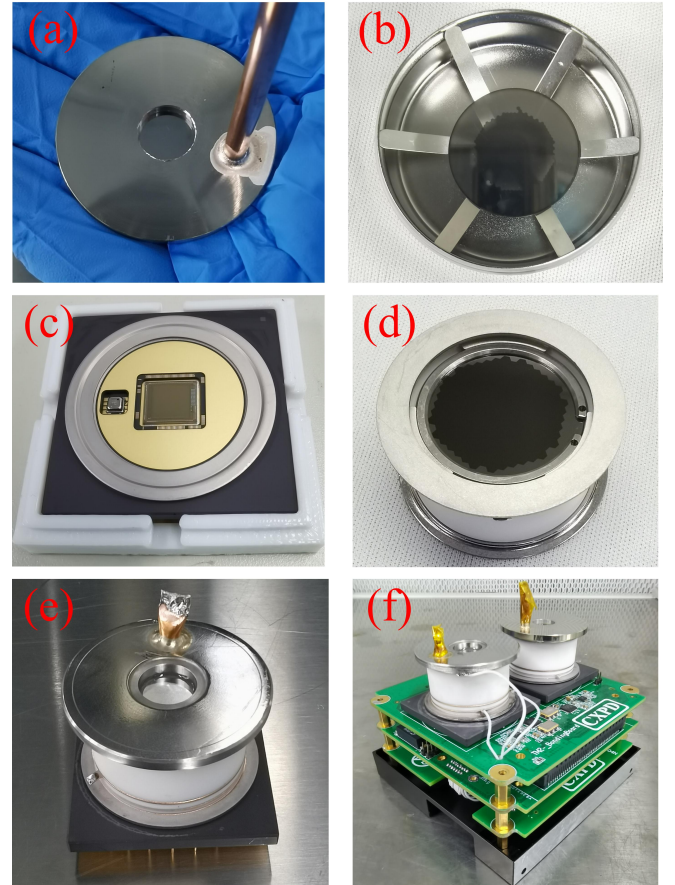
(Color online) X-ray polarization gas detector assembly photo. (a) Beryllium window and support frame; (b) GMCP; (c) Topmetal-II chip bound to the ceramic pedestal; (d) GMCP mounted in the metal ceramic tube housing; (e) assembled X-ray polarized gas detector; and (f) two gas detectors mounted on a printed circuit board.
